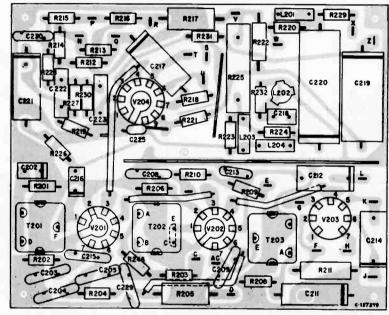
PW200-Sound, Video & 1st Sync Assembly Layout
